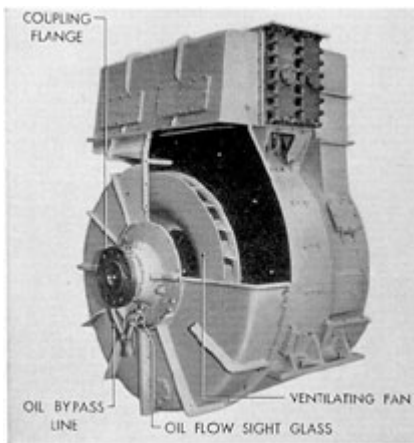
Coupling end view of G.E. main generator section cover removed.
